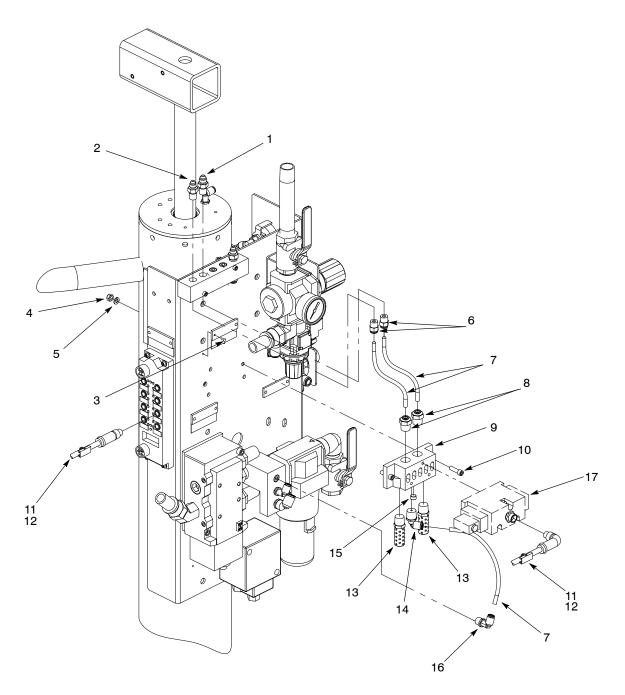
24 Vdc Automotive 125 Series Valve Base with DeviceNet I/O Block Cable
